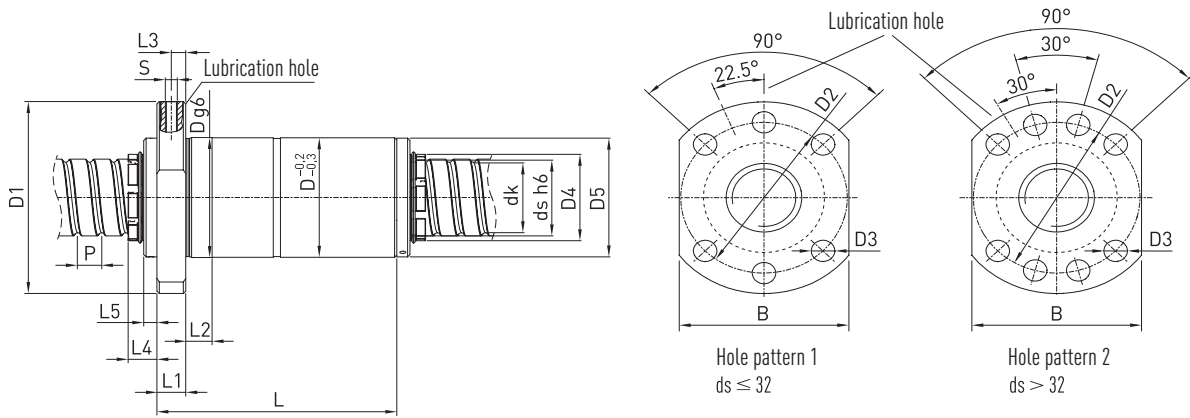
DDB double flanged nuts with SS and SH seals
